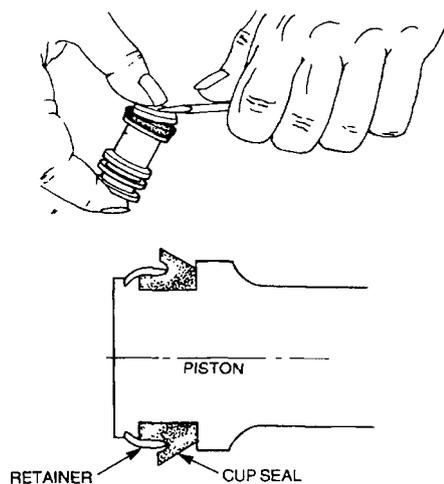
Brake Master Cylinder Pistons – Sectional View
